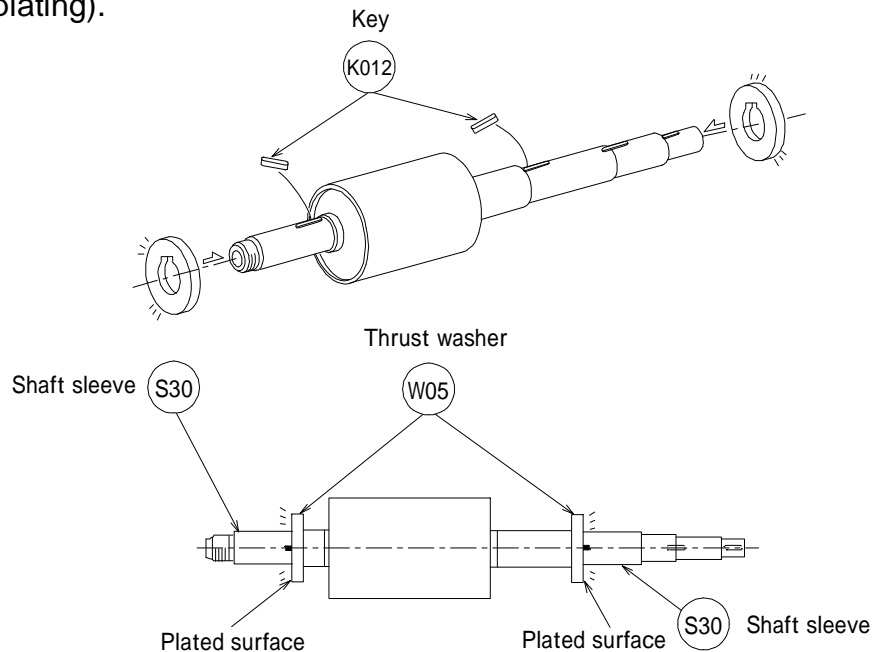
(b) How to Fix Bearing (Motor Frame No. J1~J4, K1~K4)
